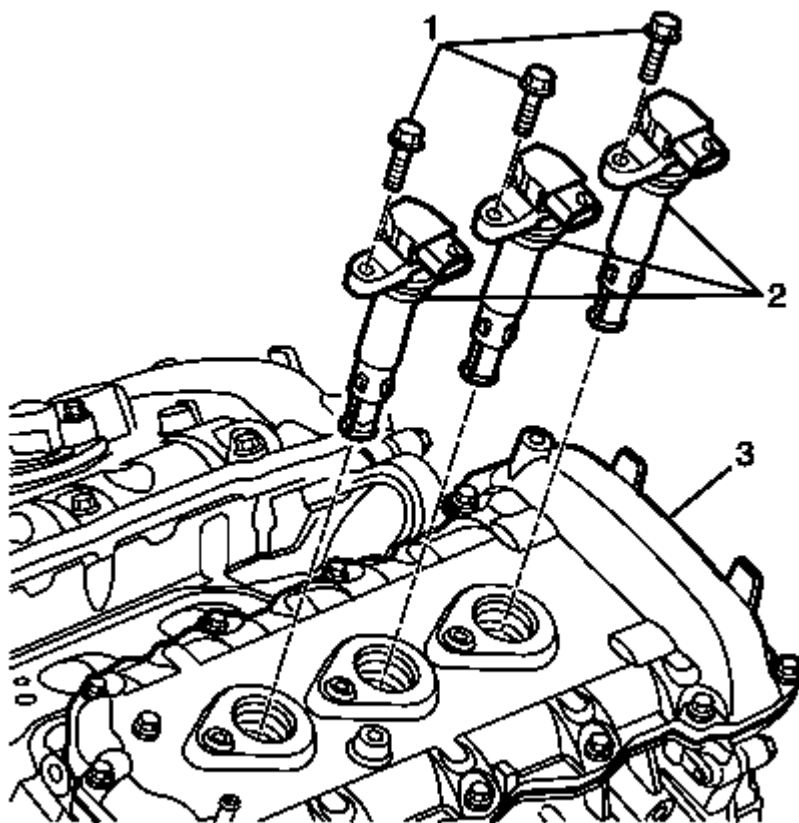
View Of Wiring Harness & Camshaft Cover
